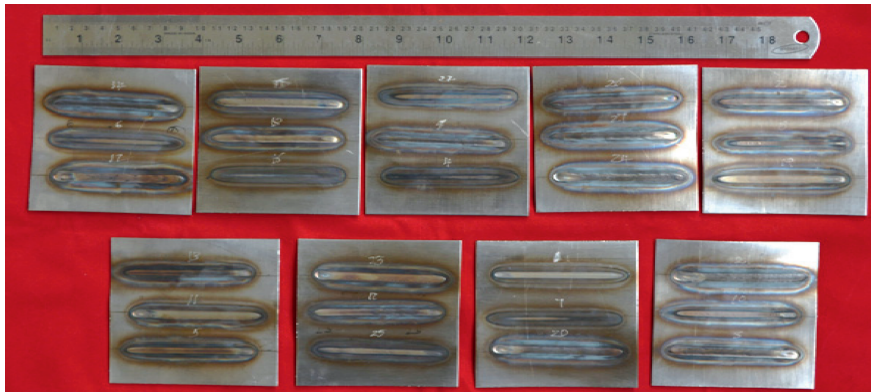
Plasma arc welded bead on plate welding of 2205 duplex stainless steel.
